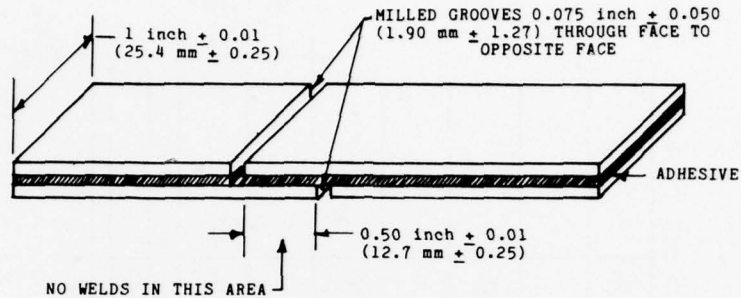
ASSEMBLY ADHESIVE STRENGTH SPECIMEN
